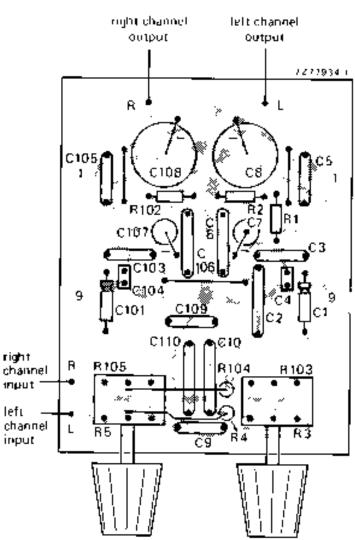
Track side of printed-circuit board used for the circuit of Fig. 12; p.c. board dimensions 83 mm  $\times$  65 mm.
